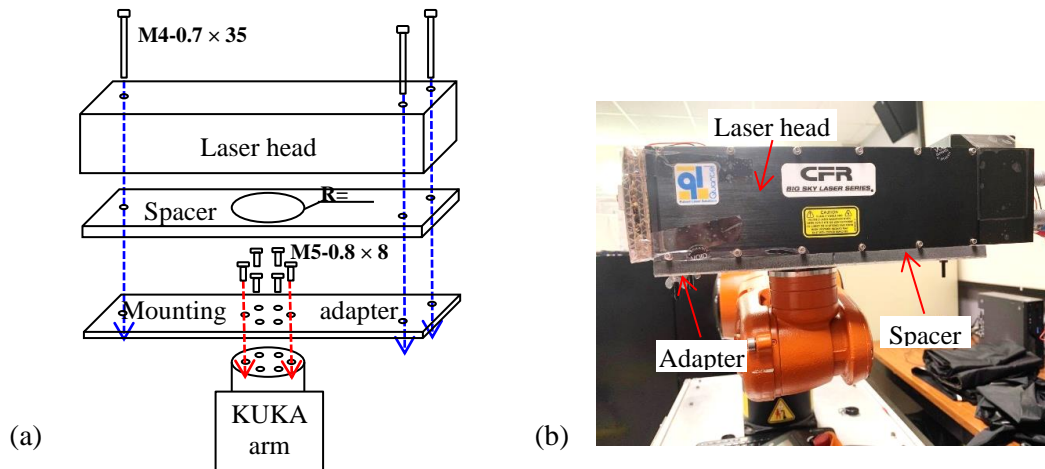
PL installation on the KUKA arm: (a) detailed schematic of the mounting process, and (b) PL laser mounted on KUKA arm
